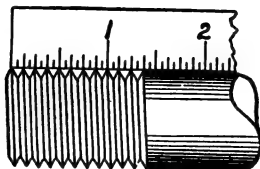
Finding the pitch of a screw without a thread gauge.
